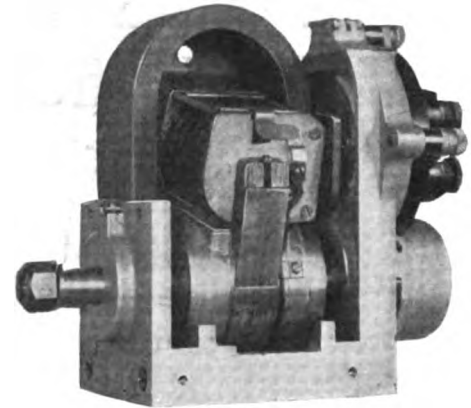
Interior view of four-cylinder Dixie with cover and one of the magnets removed to show the windings and rocking field
